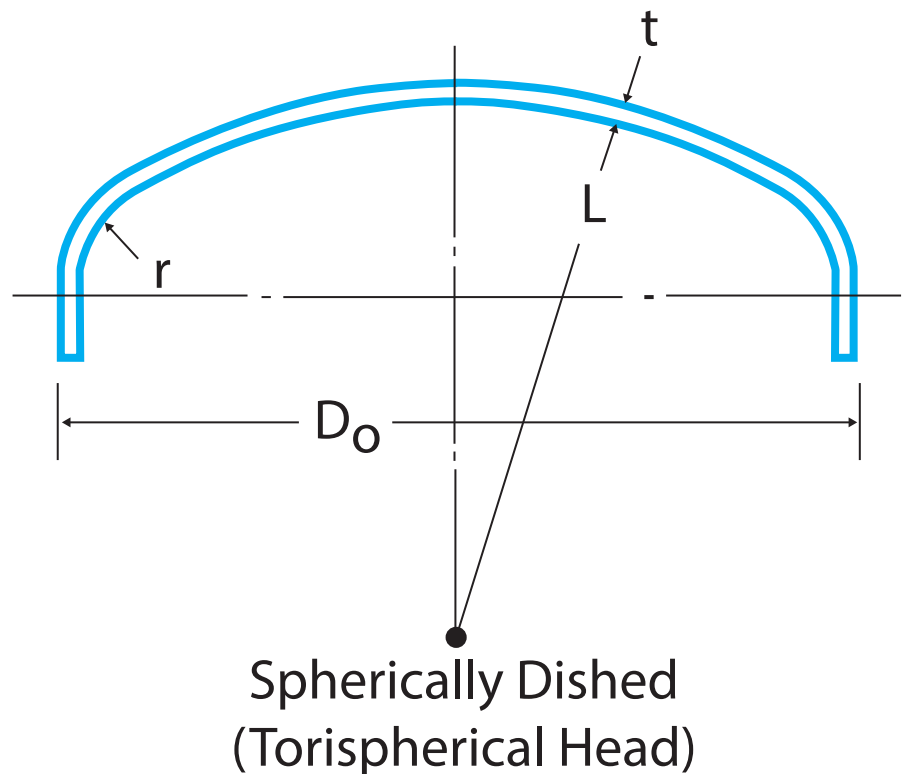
Torispherical Head Dimensioned per ASME Code Section VIII, Division 1
